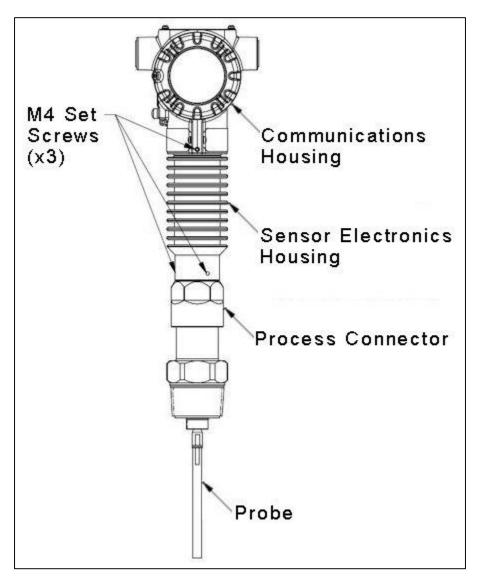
Location of Sensor Electronics Housing and attachment set screws
